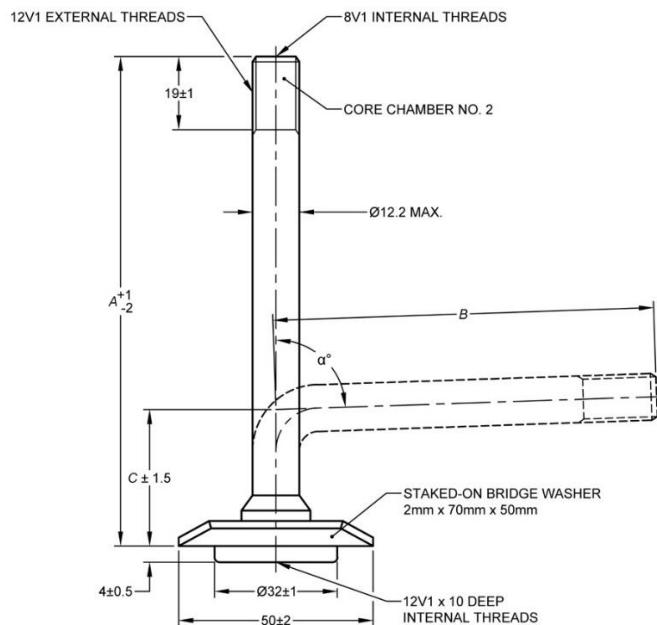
MOTORCYCLE VALVES A 29 1 45
